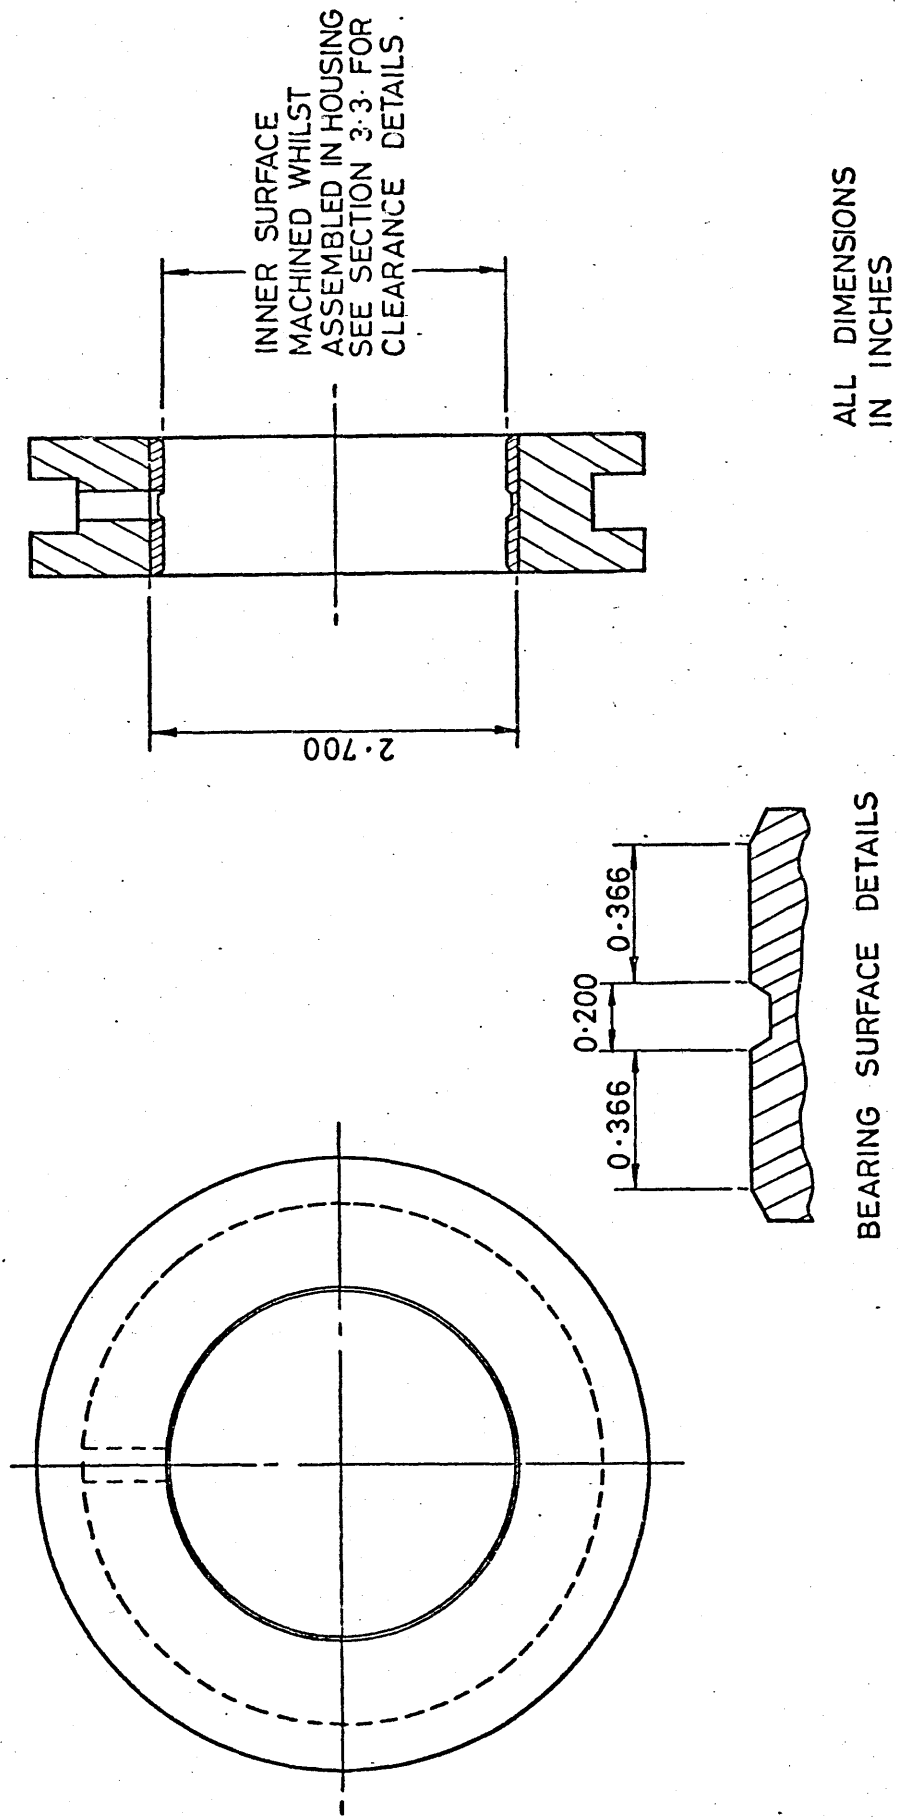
TEST BEARING AND INNER RING DETAILS.
